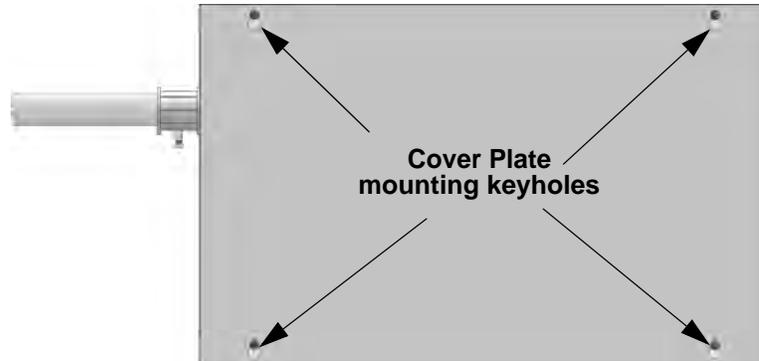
Cover Plate Mounting Keyholes and Cover Mounting Screws Alignment
